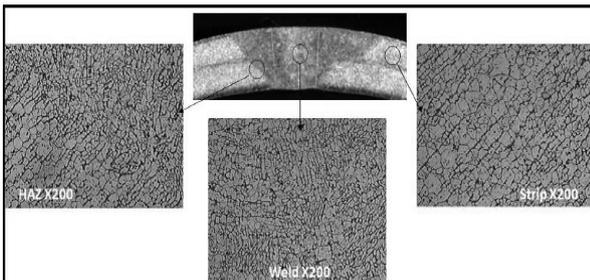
TIG welded tube cross section after nitric acid etching (S30403)
